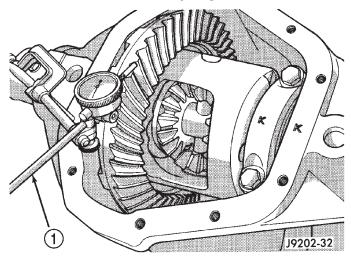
Ring Gear Backlash Measurement 1 - DIAL INDICATOR
